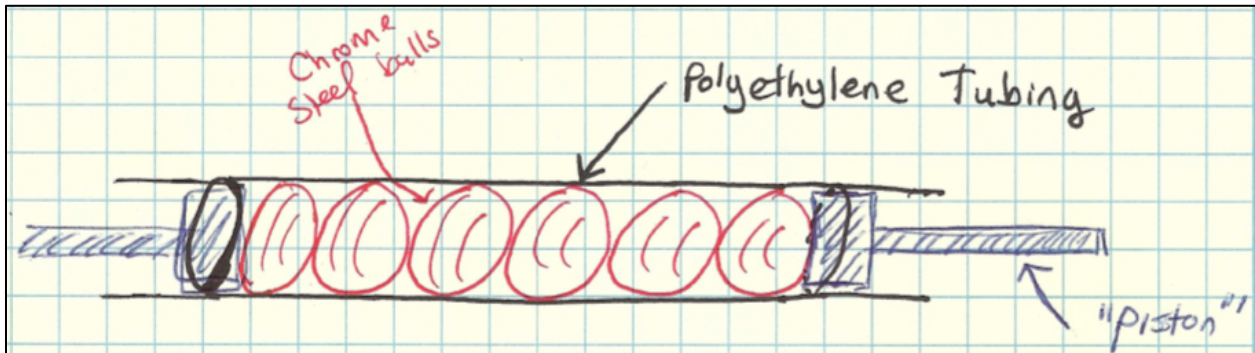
Pseudo-fluid movement-transfer system. This design creates a push-push movement system using small metal balls inside a plastic tube. This idea is similar to a closed hydraulic system.
